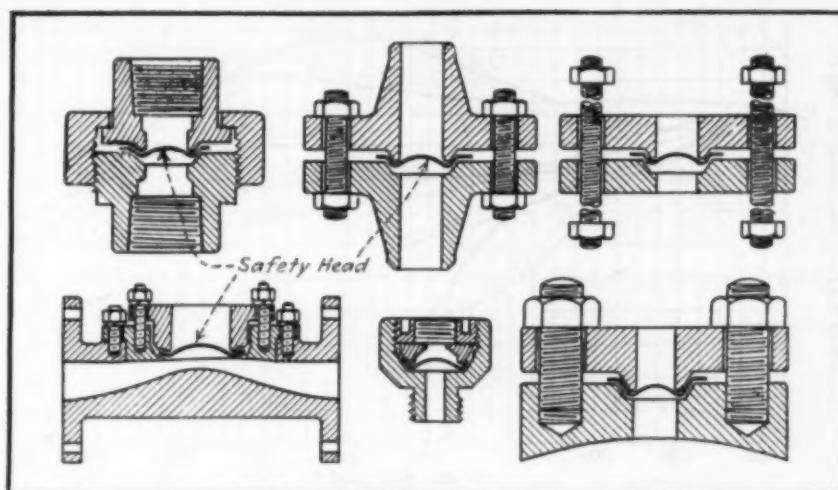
Several typical Safety Head flange and diaphragm assemblies
